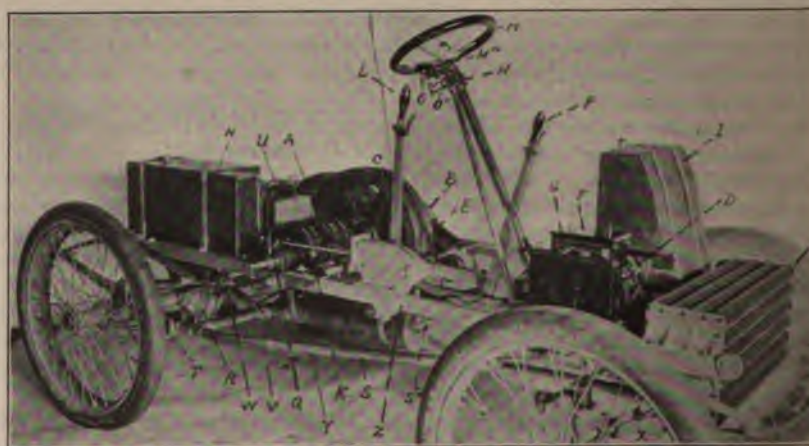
CHASSIS OF RUSSELL GASOLINE CAR.
